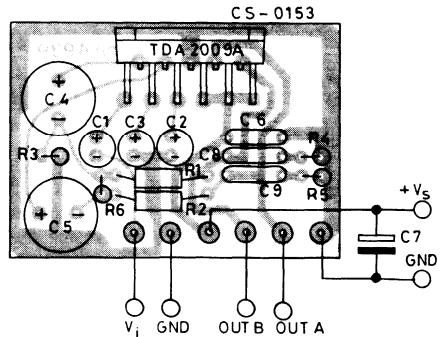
P.C. board and components layout of the circuit of fig. 16 (1 : 1 scale)
